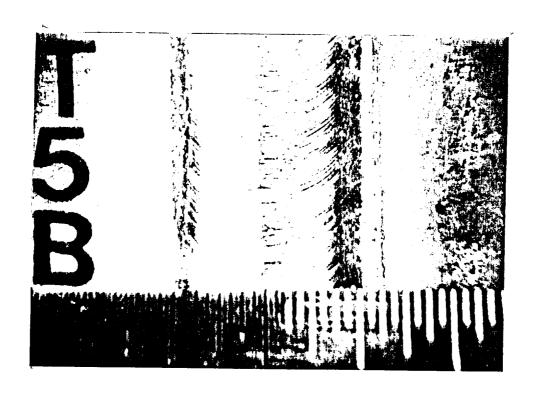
A Weld made with 325 ppm Nitrogen in shield. Cover. Front.
